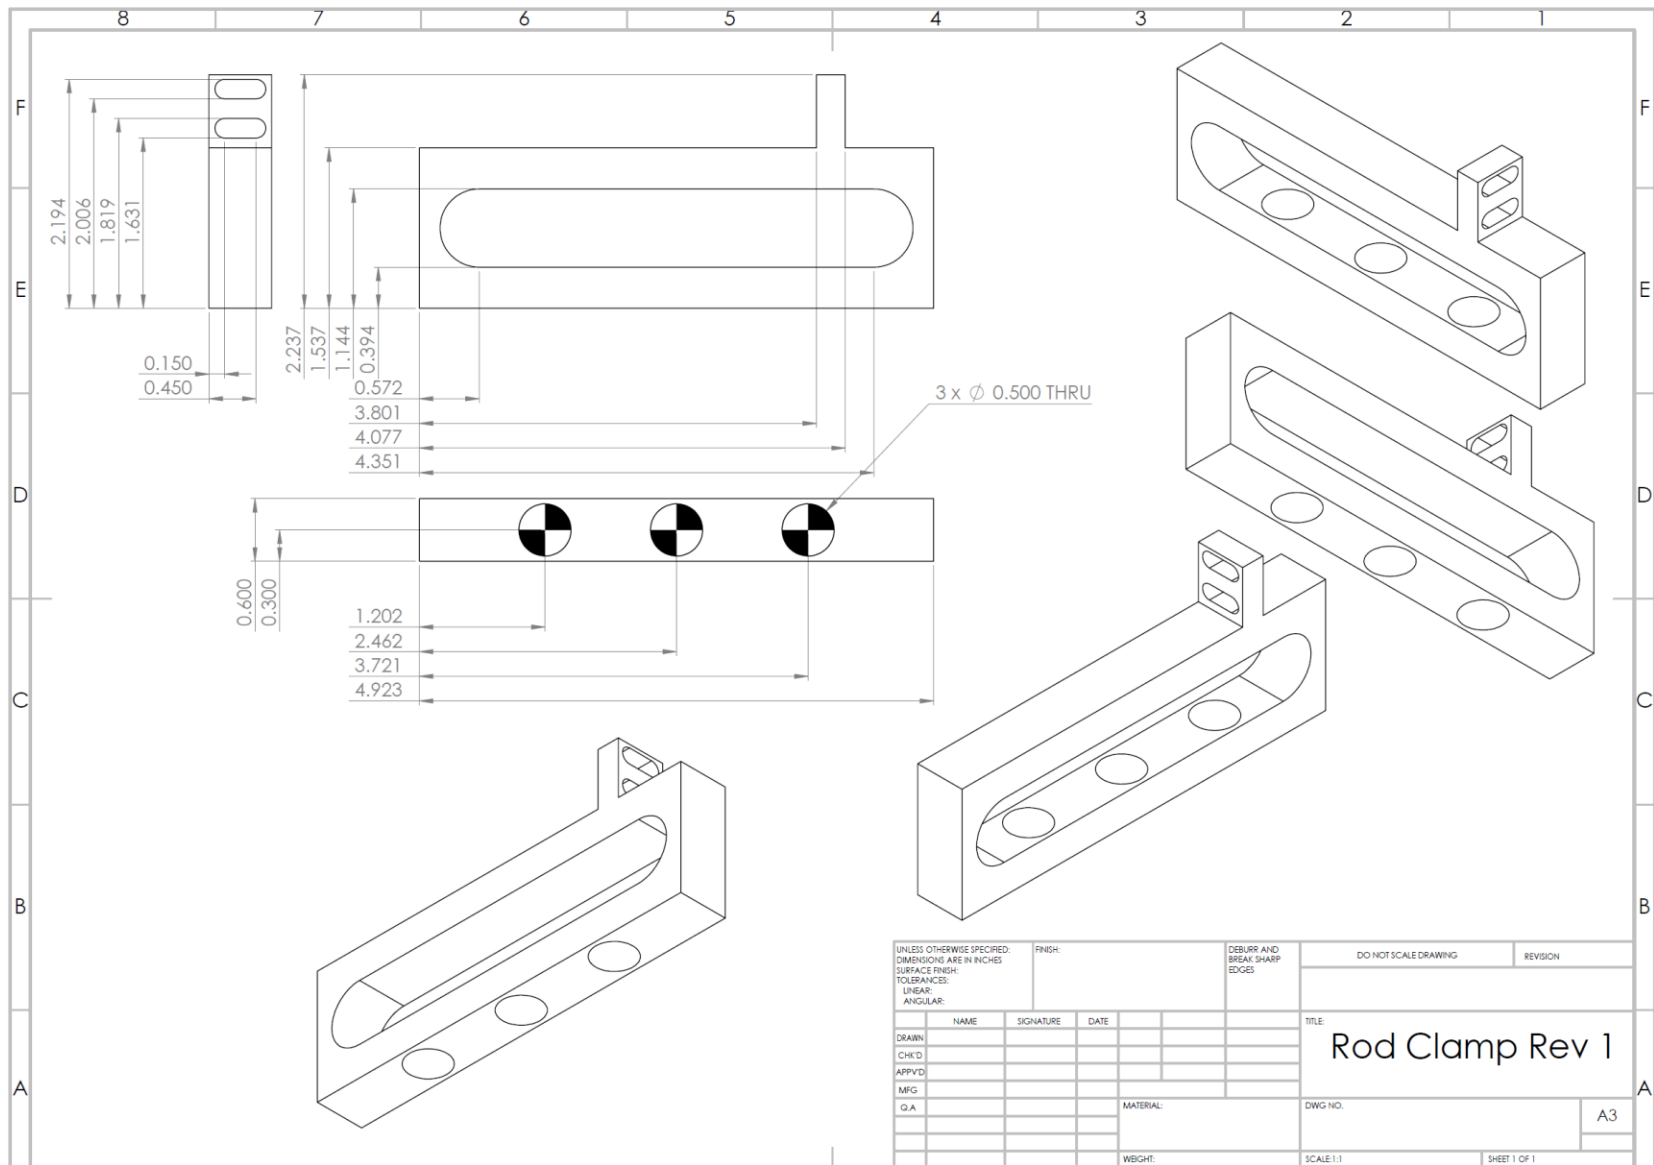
Alignment piece that translates the tuning rods using the external tuner.
